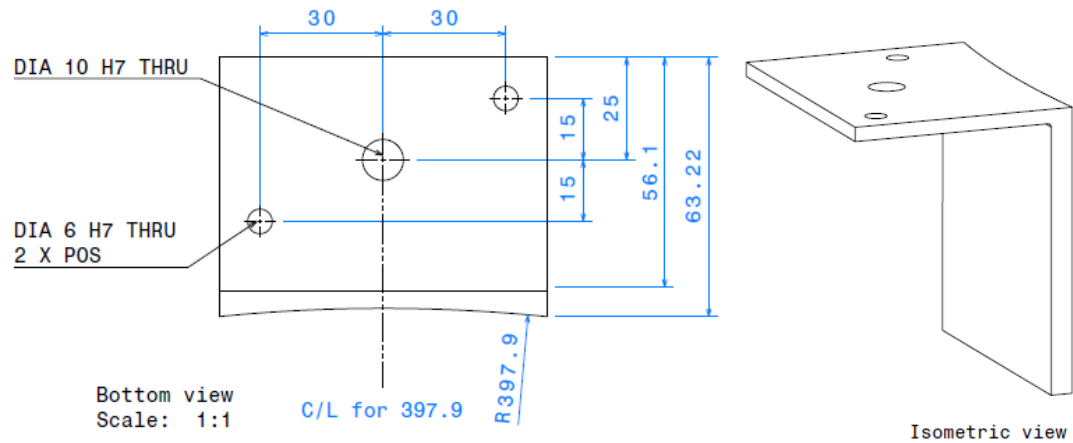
Cylinder-to-cylinder mating bracket drawing extract. 10mm datum hole used for locating upper cylinder onto mid cylinder. 6mm holes provide accurate location holes for fixture alignment during bonding procedure.
